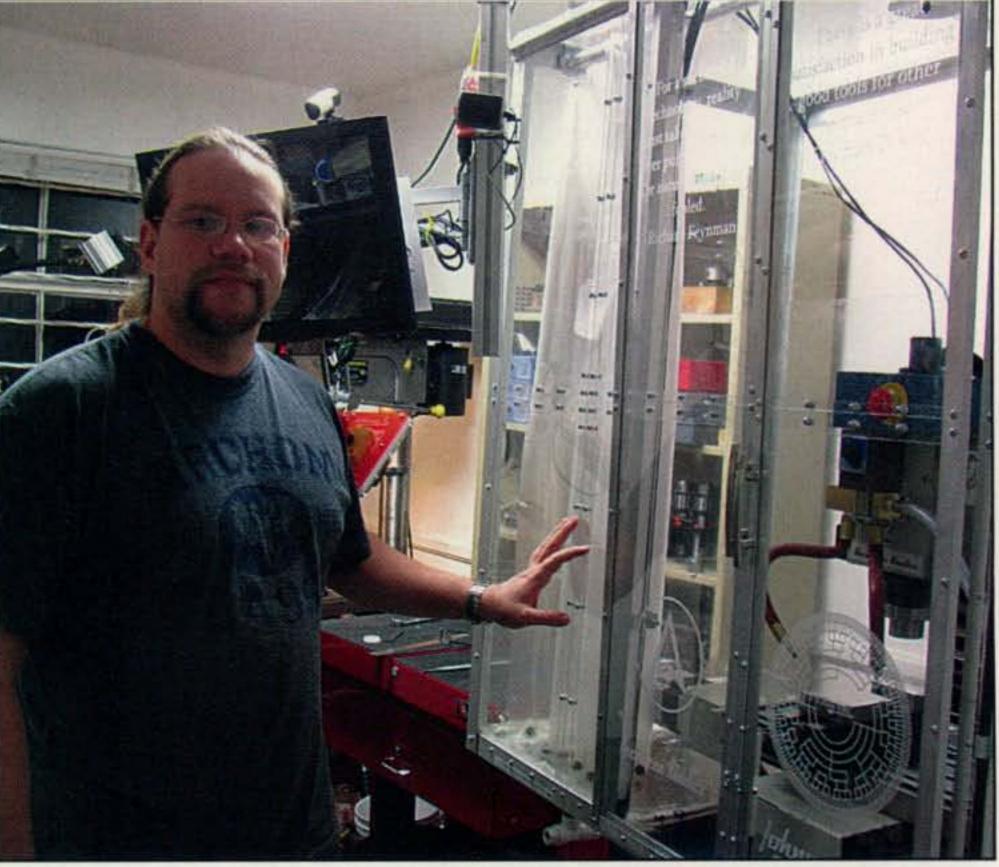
Justin Corwin in front of Johnny 5, the rebuilt and modified CNC milling machine at Crash Space.
